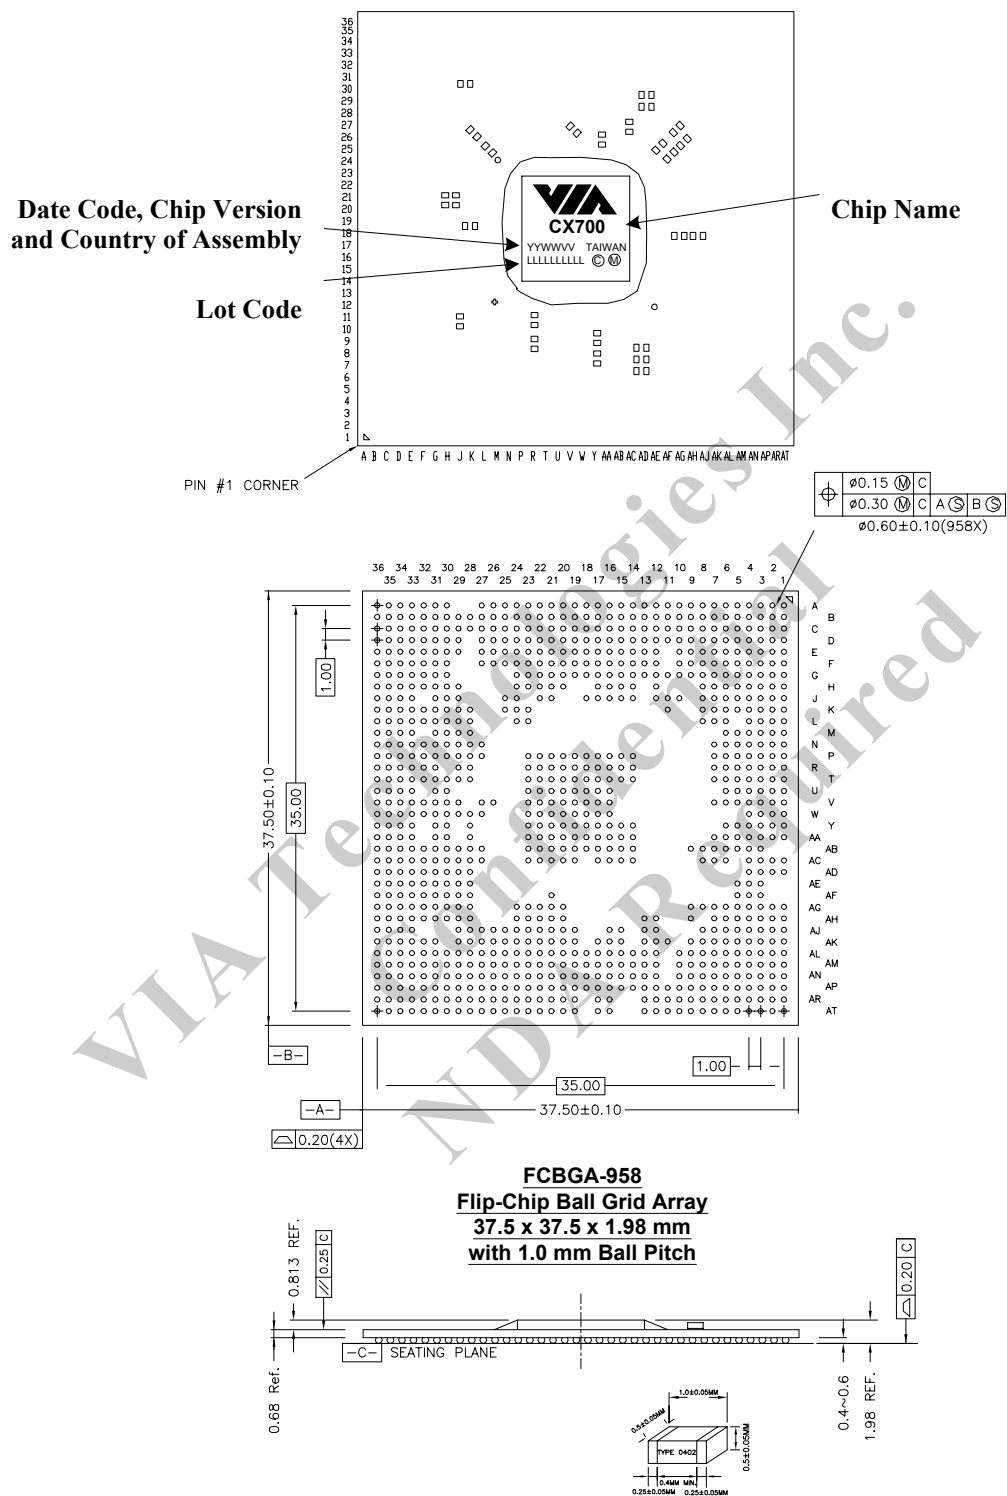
Mechanical Specifications – FCBGA-958 Ball Grid Array Package
